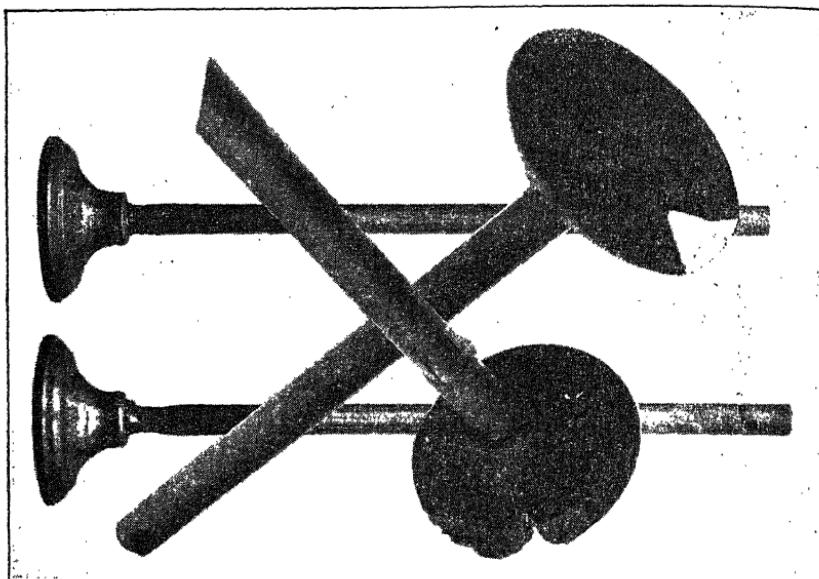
Valves Burned, Pitted, and Damaged in Service
